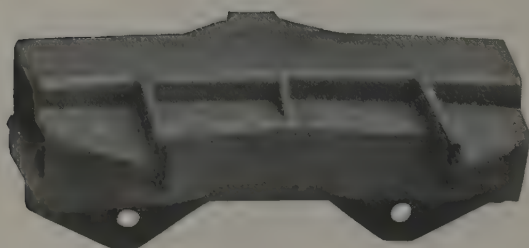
Susemihl Side Bearing for Six-Wheel Passenger Train Car Trucks.
